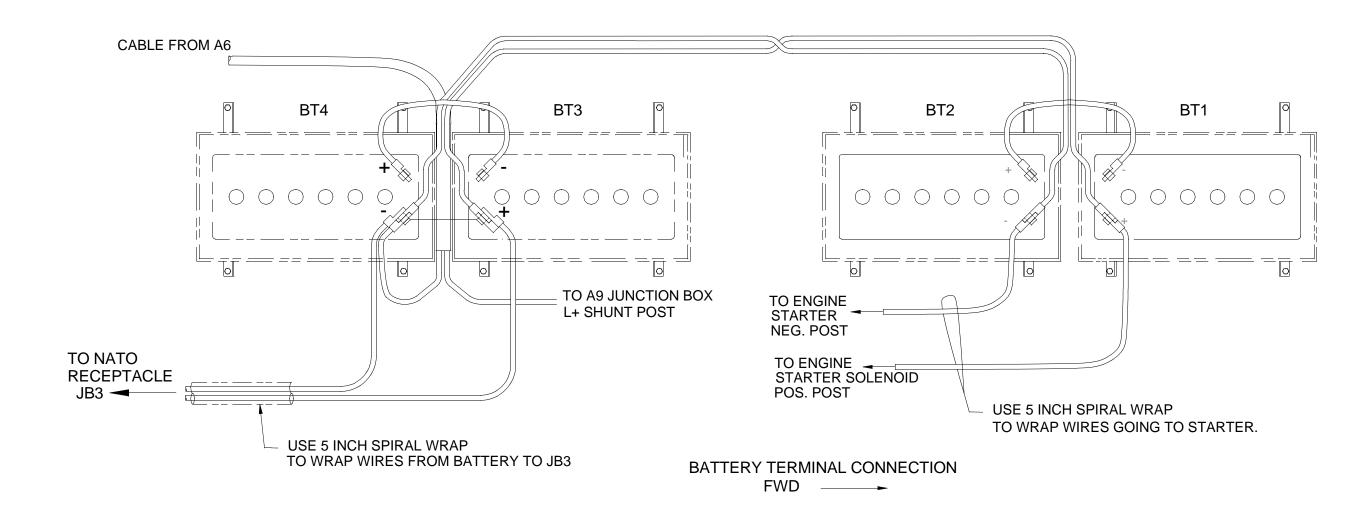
MCS Propulsion Module Electrical Assembly Wiring Diagram (Sheet 3).
